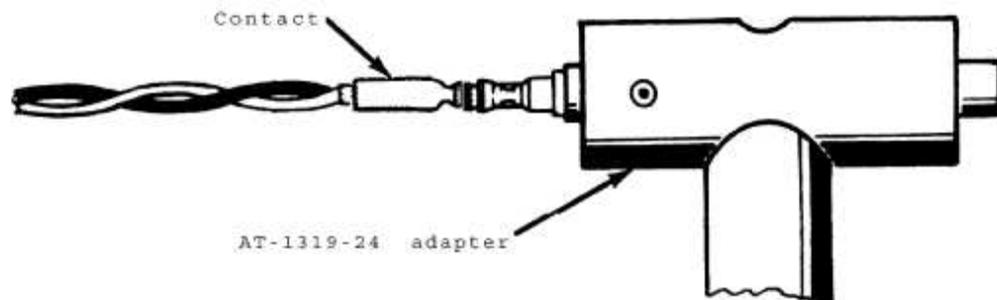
Contact Inserted into AT-1319-24 Adapter
